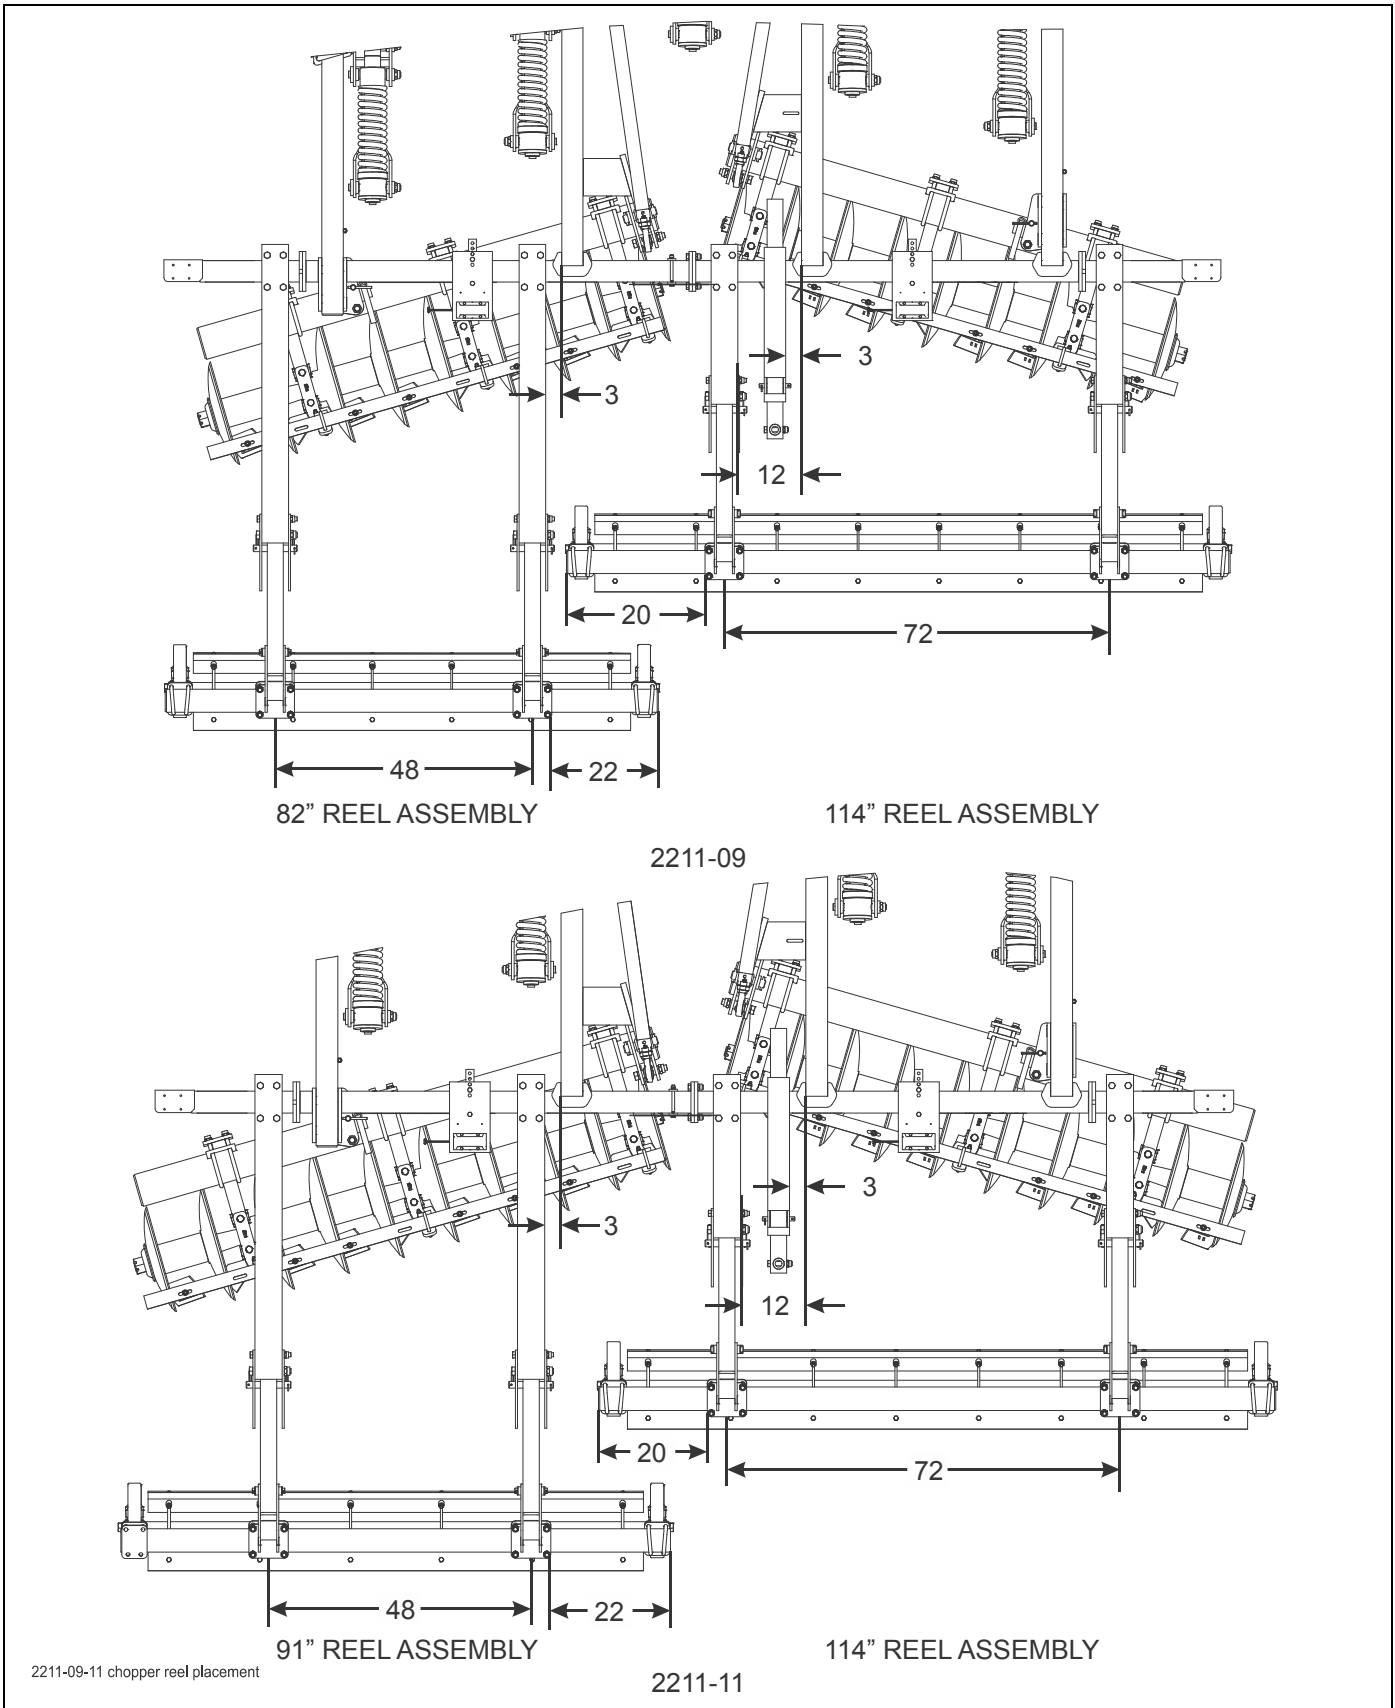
Standard and Hydraulic Tubular Mount Chopper Reel Placement (2211-09 & 2211-11)
